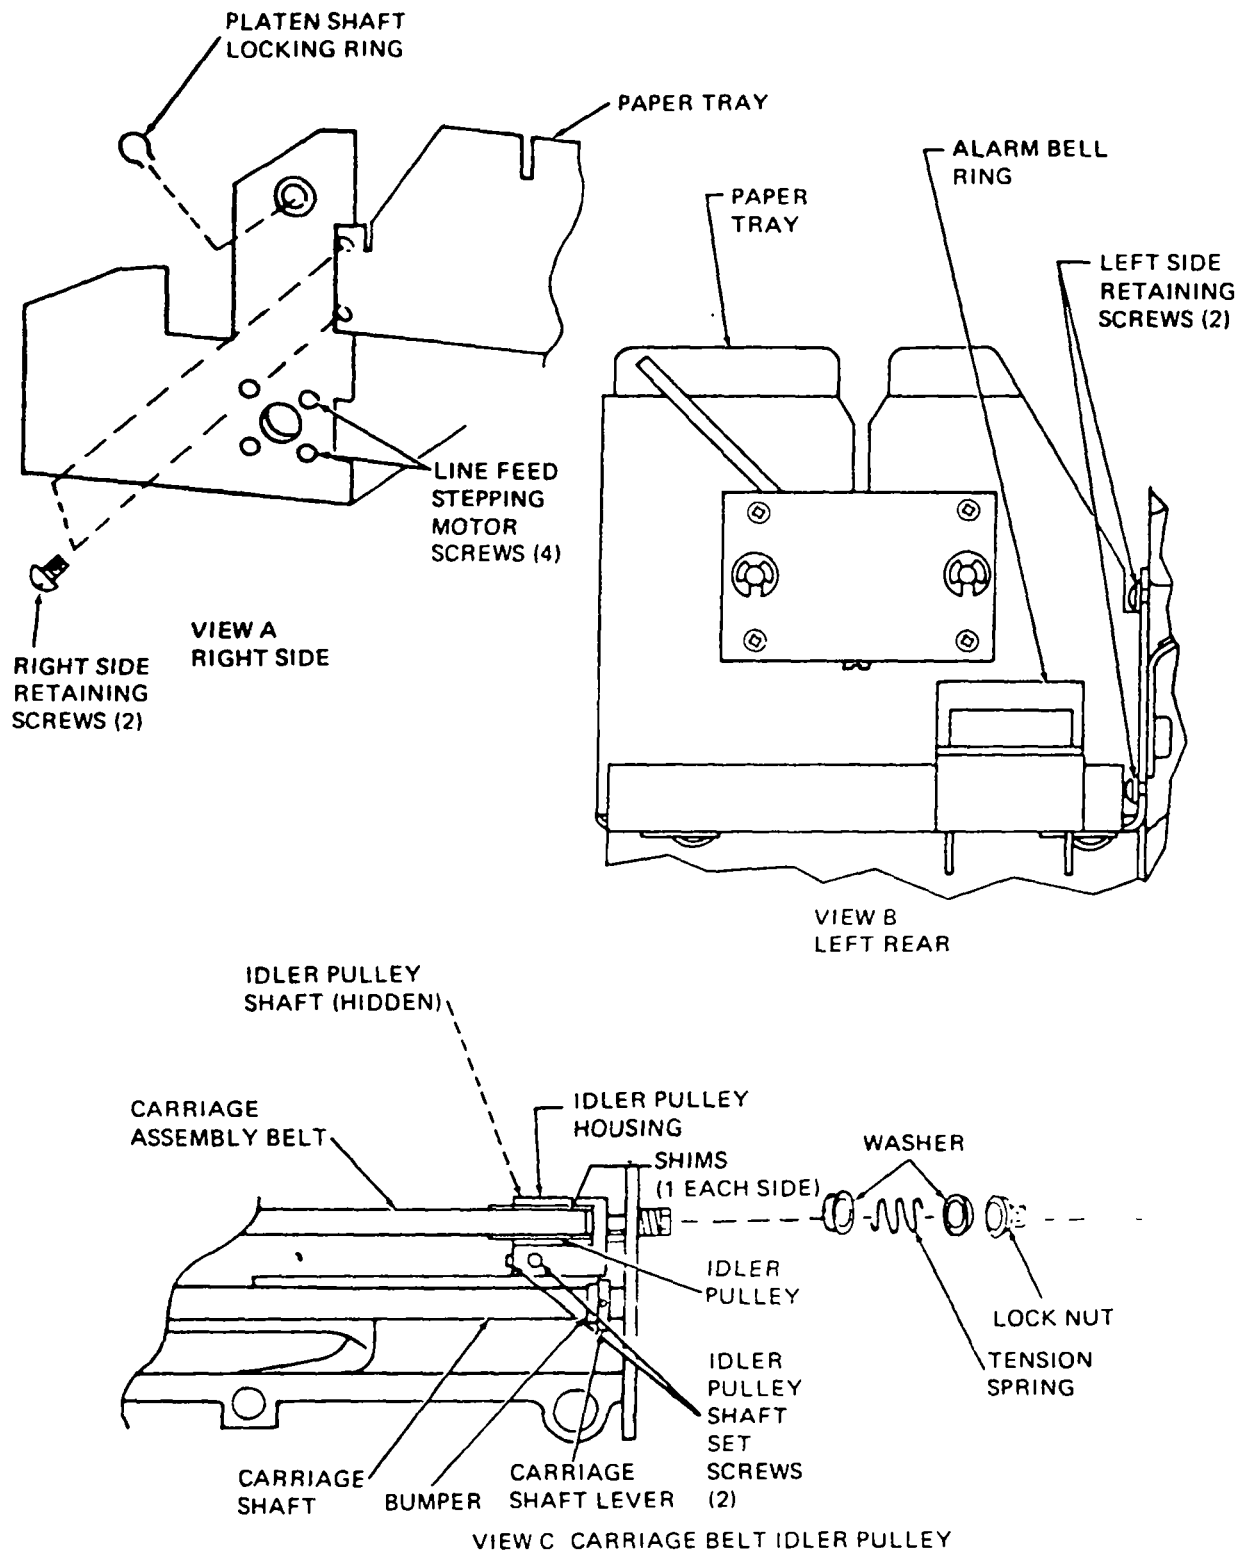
Print Mechanism Module, Carriage and Line Feed Belts (Sheet 1 of 2)
